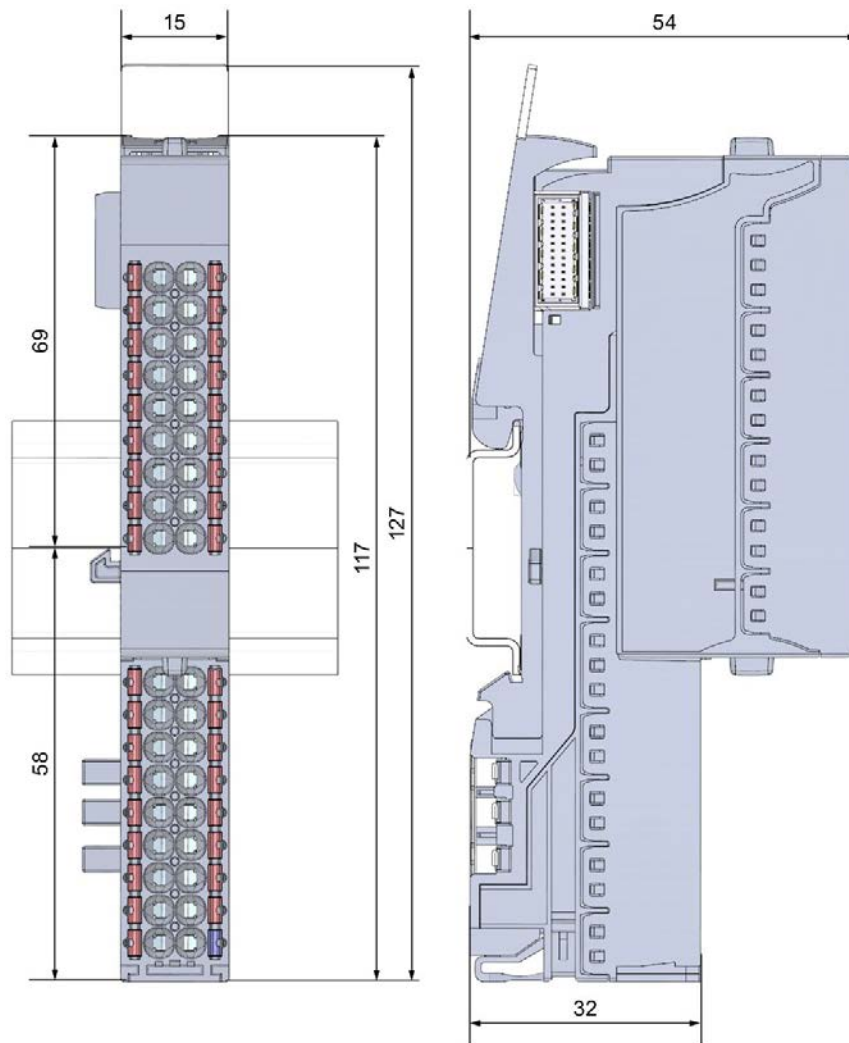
Dimension drawing of PotDis BU-P1/B-R with plugged-in terminal block
